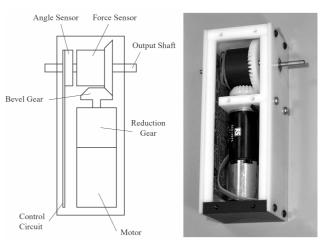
A Programmable Spring Actuator schematic and the prototype currently under construction. A bevel gear is employed to produce a thin actuator intended for constructing robot leg joints. The dimensions are approximately 50x50x120mm.
